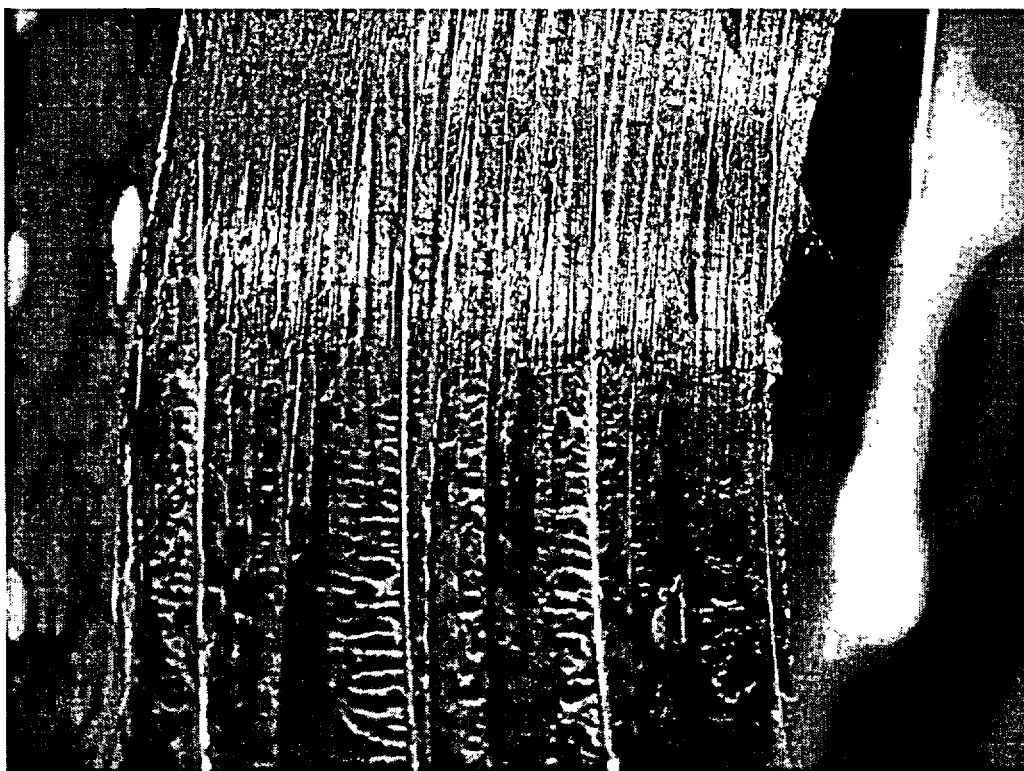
(i)-4. Looking at J-groove weld underface (bored surface). Crack indication corresponds to axial crack (near 0°) indication in Figure 3(i)-1.
